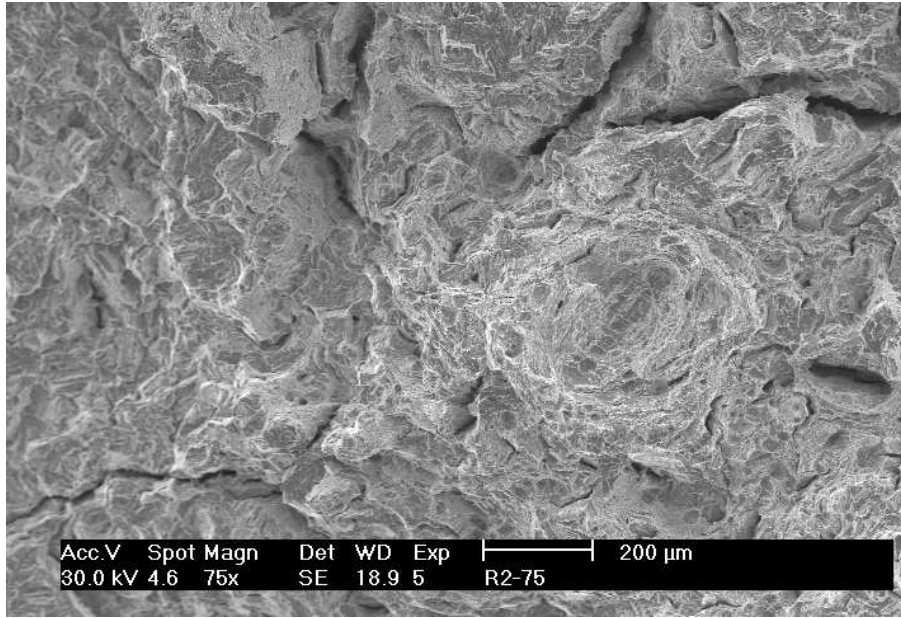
F82Hmod fracture surface of $r = 2\text{mm}$ notched specimen tested at $T = -75^\circ\text{C}$.
